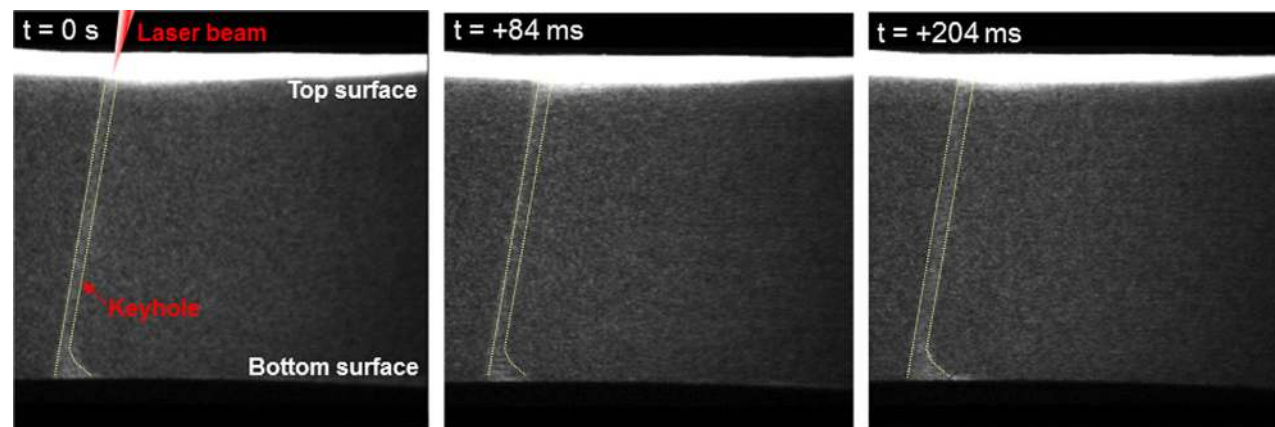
In situ* X-ray transmission images during high-power fiber laser welding with optics system B showing stable keyhole behavior and no bubbles.
